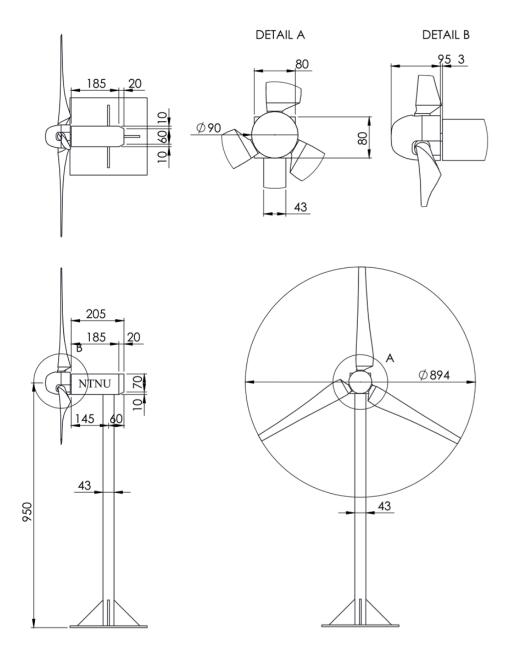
Technical drawings of the NTNU turbine, measures in mm.
